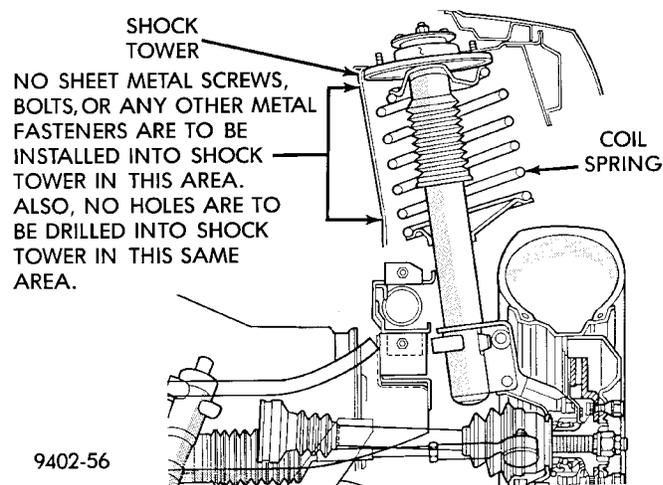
Shock Tower To Spring Minimum Clearance Area
